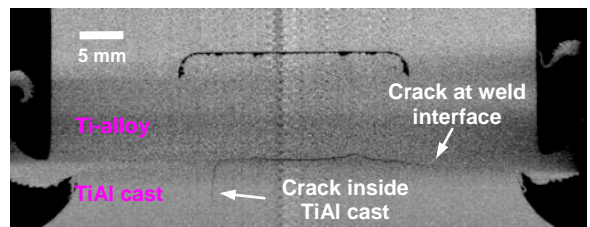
A re-sliced axial CT image for welding sample #3 shown in Fig. 8a.
